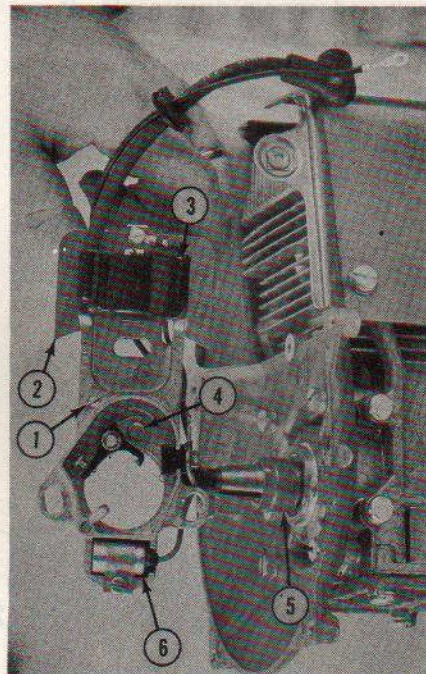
On some chain saw engines, the magneto stator plate mounting holes are slotted as shown so that ignition timing can be adjusted by relocating position of stator plate.
